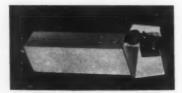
Improved tool-holder announced by Carmet Division of the Allegheny Ludlum Steel Corporation
